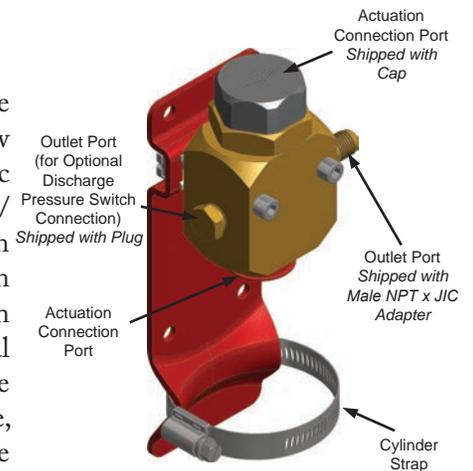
Remote Pneumatic Actuation/Bracket Kit
